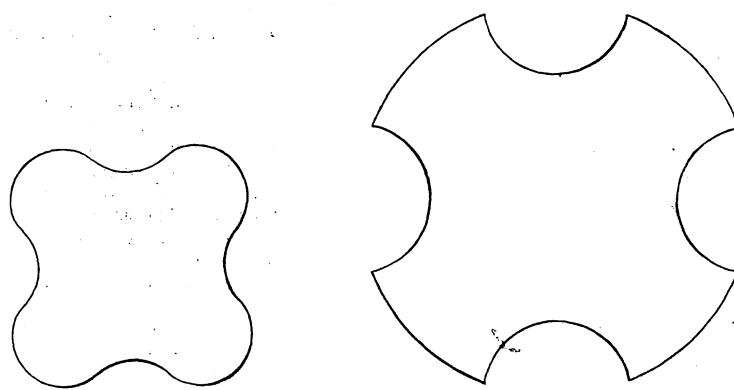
Wabbler, English Standard 20-Inch Sheet Mill.
